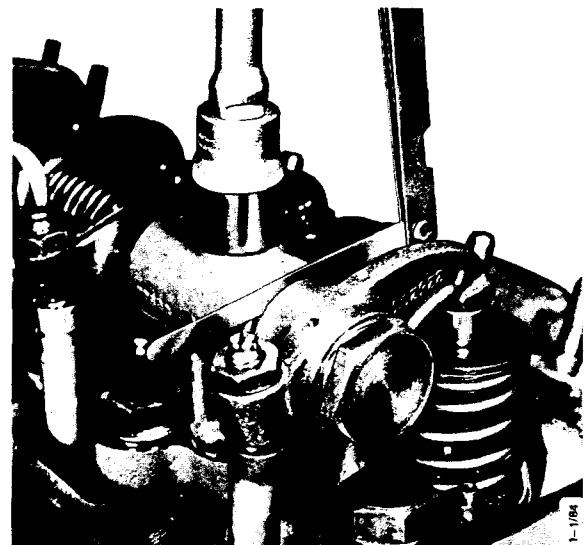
Insert an 0.15-mm feeler gauge between the outer rocker arm and bearing bracket before finally tightening the rocker arm shaft
